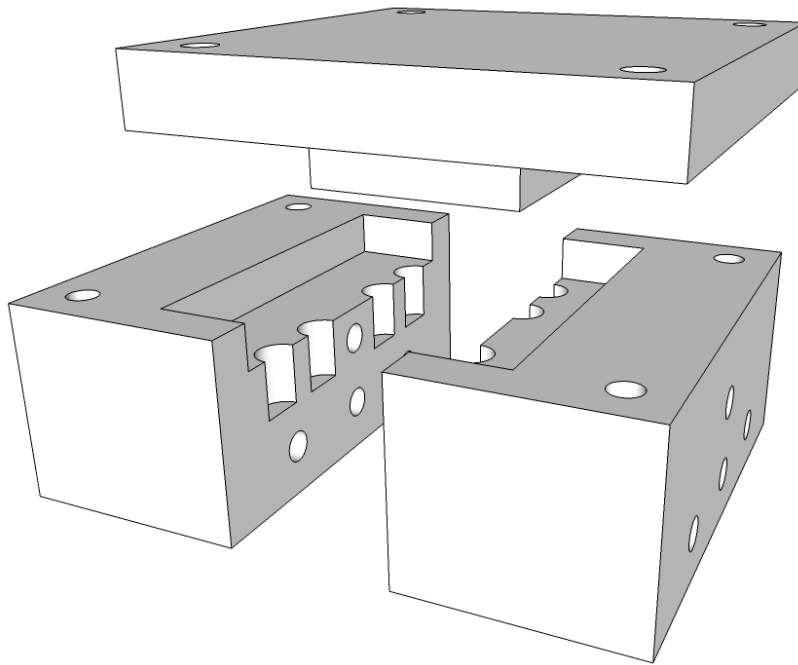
Custom-built three-piece mold for hot compression molding of specimen required for testing of the coefficient to thermal expansion using a thermomechanical analyzer.
